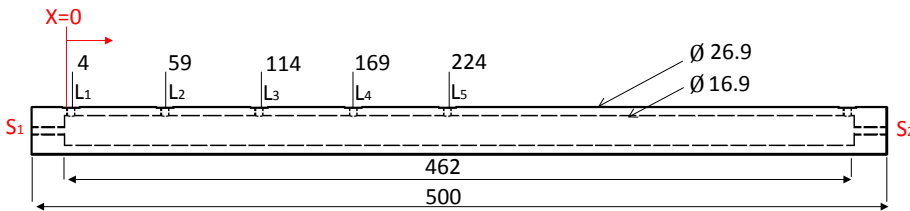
Drawing of the 3/4" tube of the test setup (dimensions in mm).
